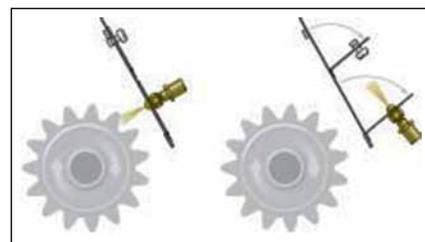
Recommended spray bar design for easy checking of spray pattern.
